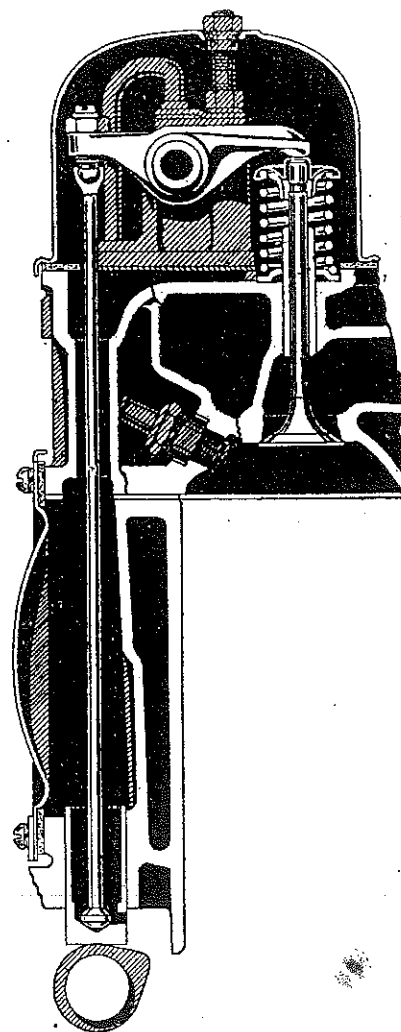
Valve mechanism on 228, 236, 248, 256, 270 & 302 engines
